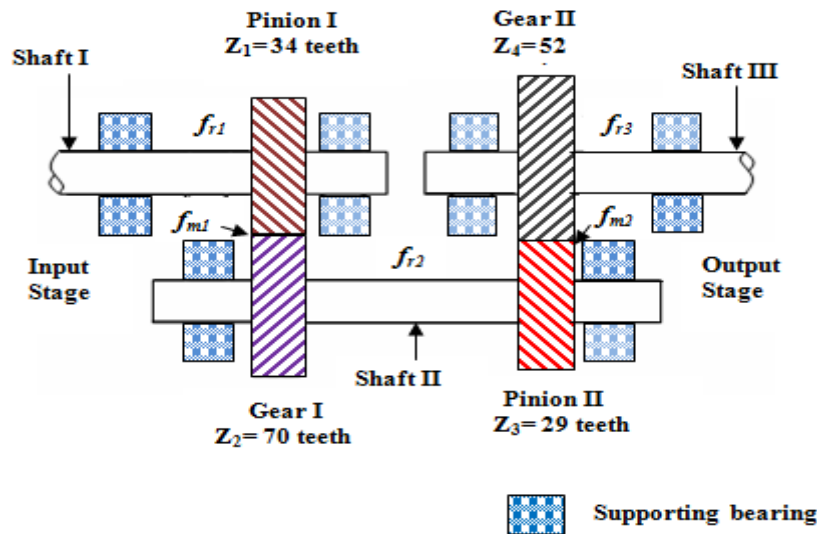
Schematic of the fundamental structure and working principles of a two-stage helical gearbox
